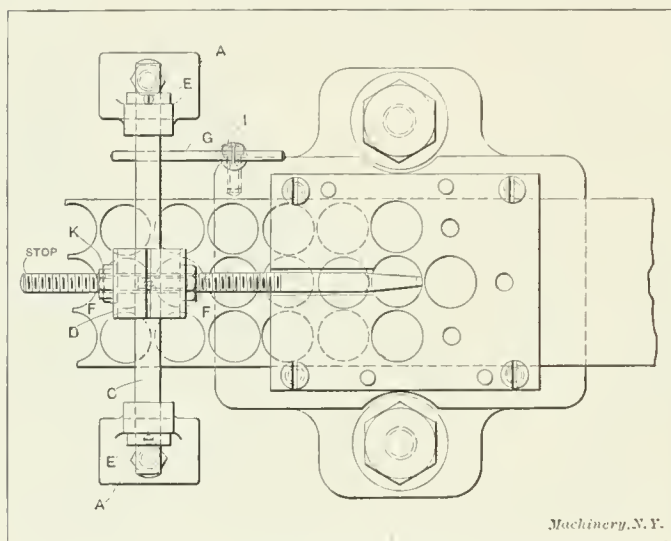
Plan View showing how Three Washers are blanked with One Stroke of the Press
